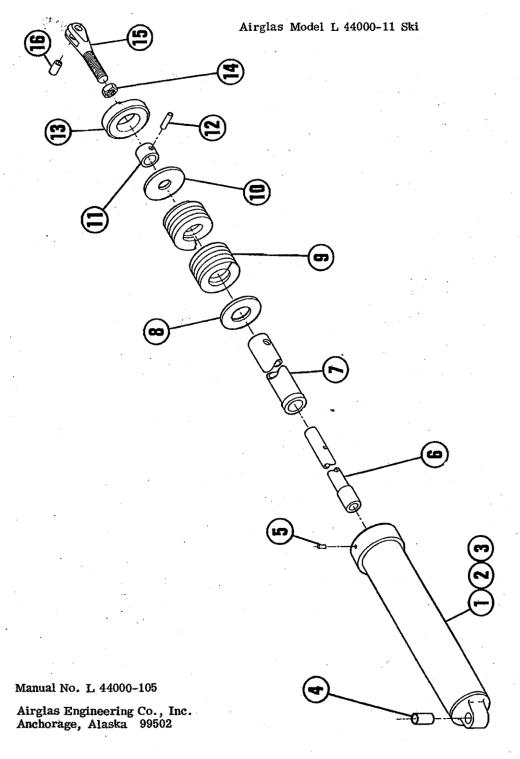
P/N L 44000-17 Spring Cylinder Assy. Fwd. - Exploded View
